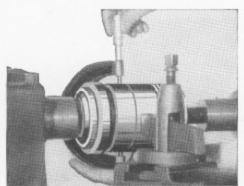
Measuring Piston with Micrometer Caliper to Check Alignment of Centers
